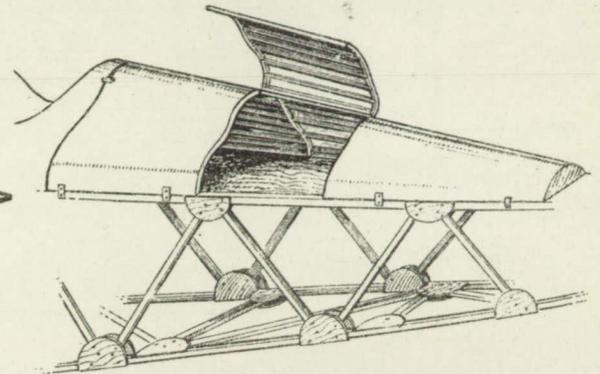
Details of the stabilizer and elevator construction. Reproduced from "Flight" by permission
